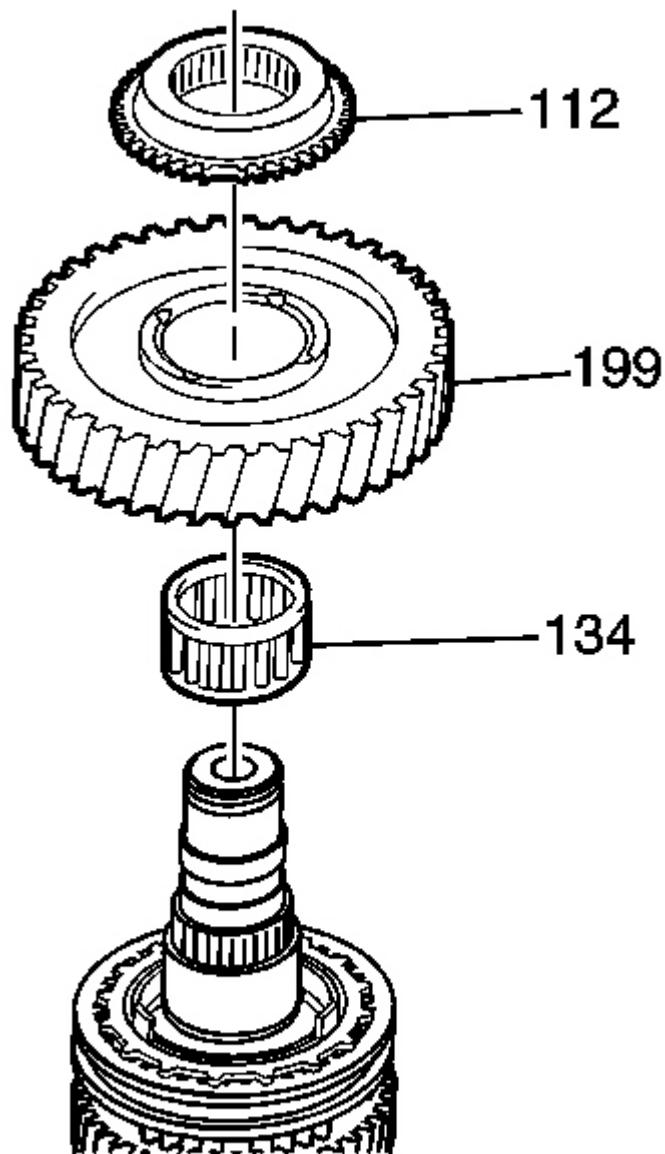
View Of Reverse Gear Spline, 1st Gear & Bearing
